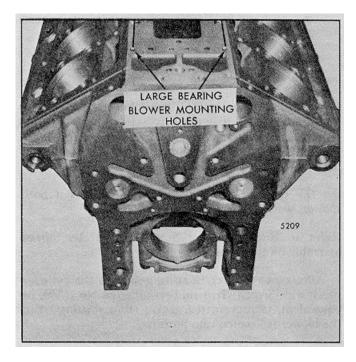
Location of Large Bearing Blower Mounting Holes
